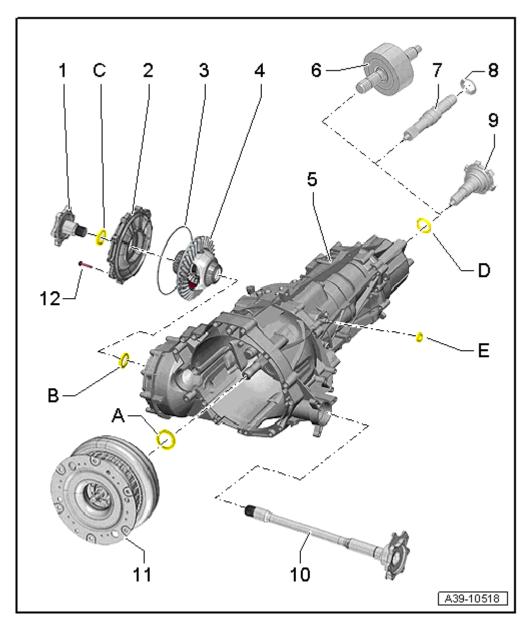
Identifying Shaft Seals On Transmission Overview Courtesy of AUDI OF AMERICA, LLC
